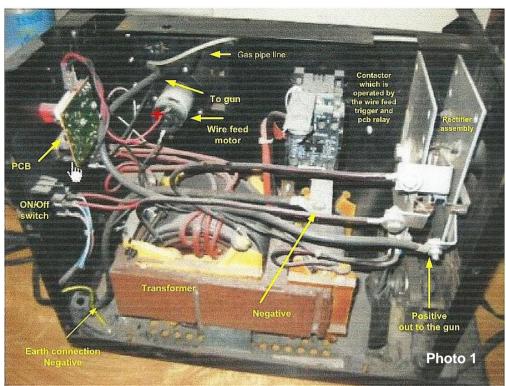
BOC Mig Welder Before Conversion To GAS/No GAS Option.
